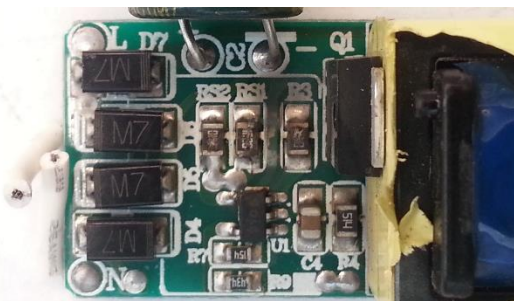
Failure location of CHWW 7 – Degradation of Surface Mount Components.
